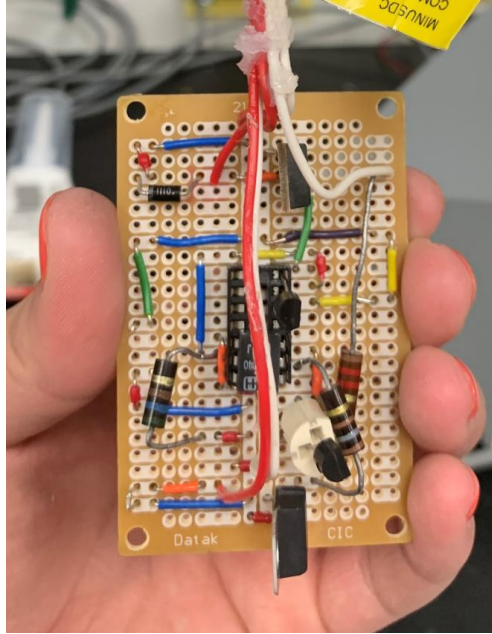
Solenoid Circuit Soldered on Prototyping Board
